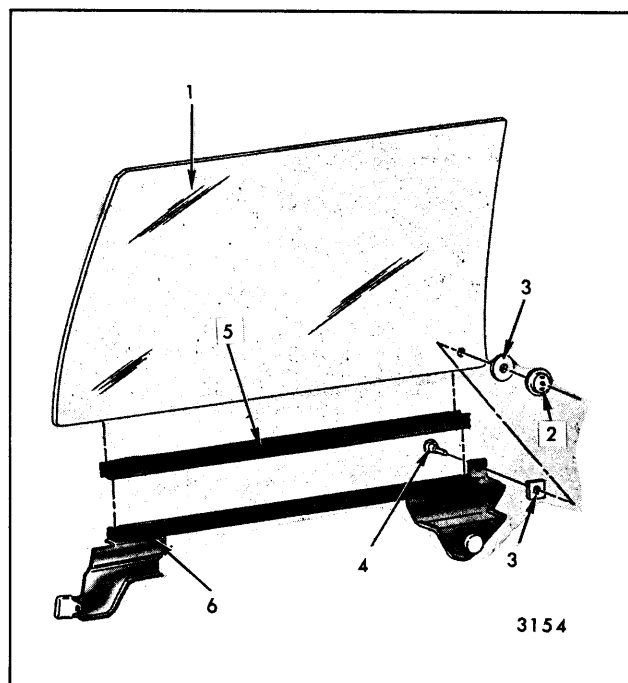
Front Door Window Assembly - "A-39" Styles
